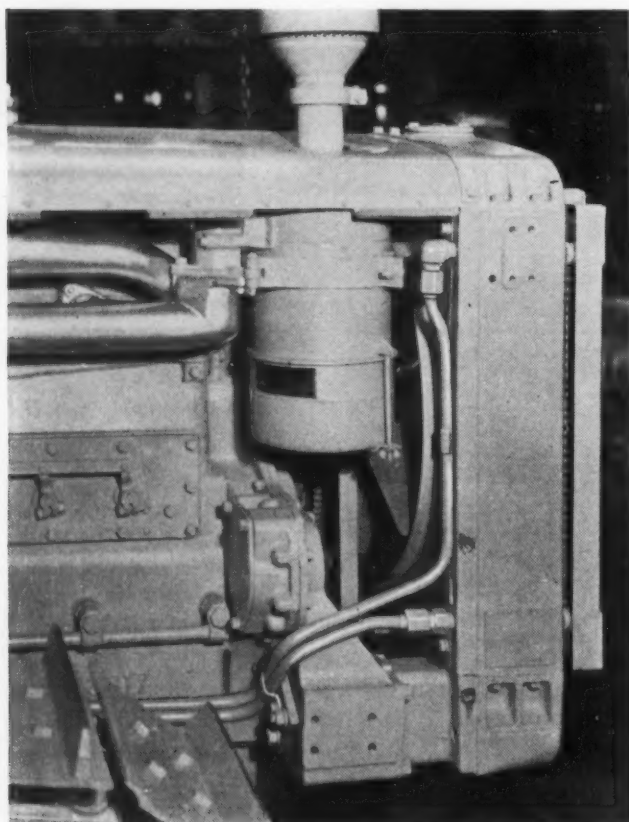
DIESEL ENGINE FOR TRACK-TYPE TRACTOR SHOWING OIL-COOLER INSTALLATION
